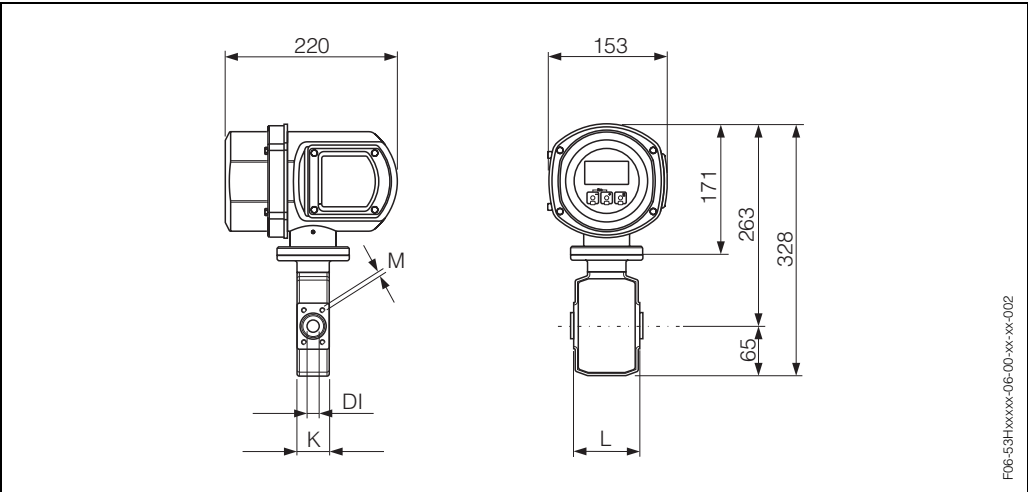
Dimensions Promag H / DN 2...25 (compact version, stainless-steel field housing)
